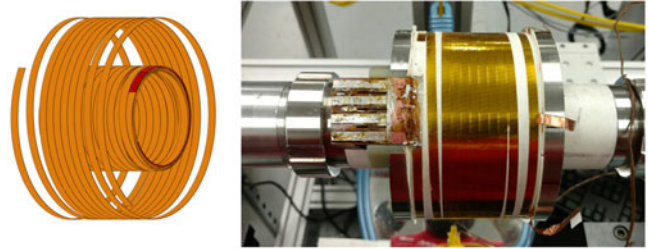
CAD model rendering of test coil windings (left) and completed test coil on winding machine (right).
